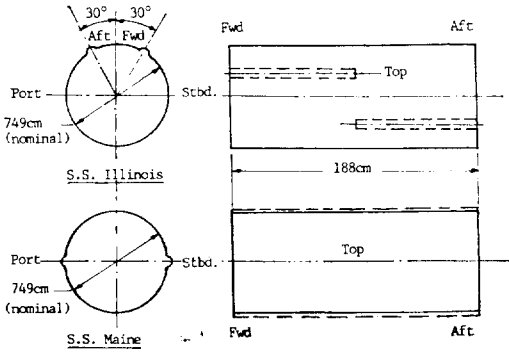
Stern tube bearing for S.S. Illinois and S.S. Maine
